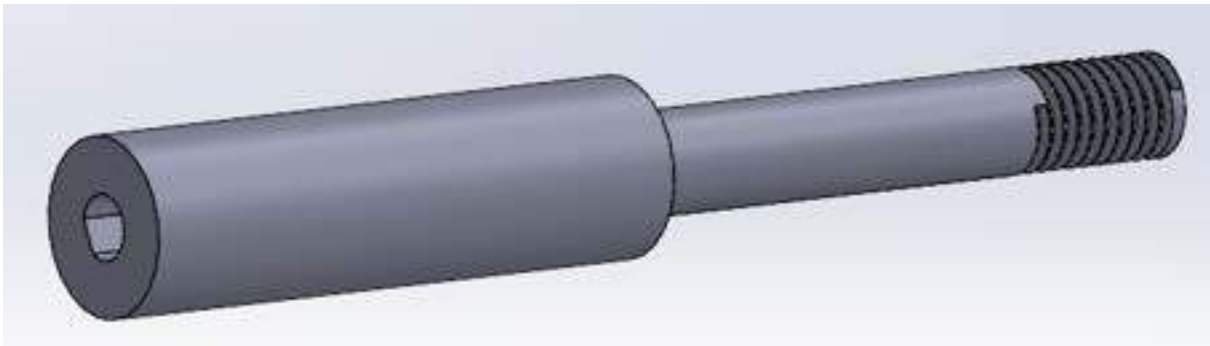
Stepper Motor - Magnet Housing Connection. The connector includes a press-fit cavity to fit on the D-shaft of the stepper motor, and 3D printed threads that allow for attachment to the magnet housing. This connector will allow the stepper motor to rotate the magnet housing to change the resistance level.
